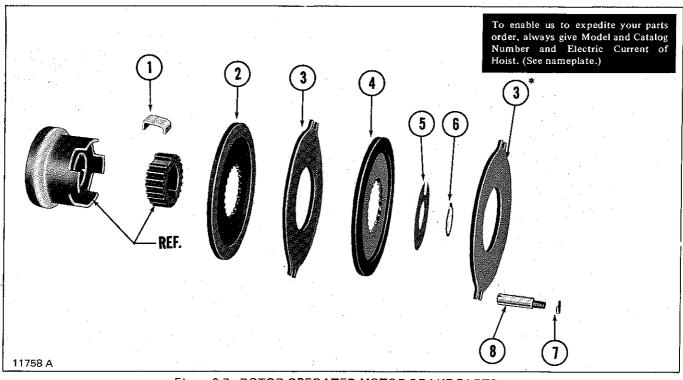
ROTOR OPERATED MOTOR BRAKE PARTS (Single Phase, Standard Model Hoists)
